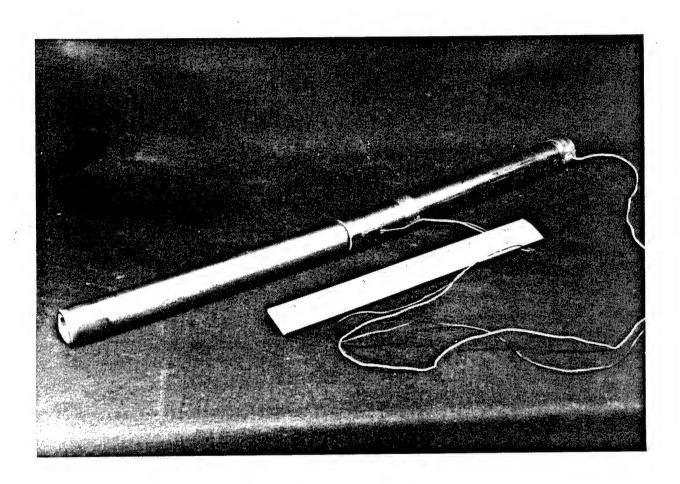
Post-Test Photograph of Instrumented Fatigue Test Track Pin
